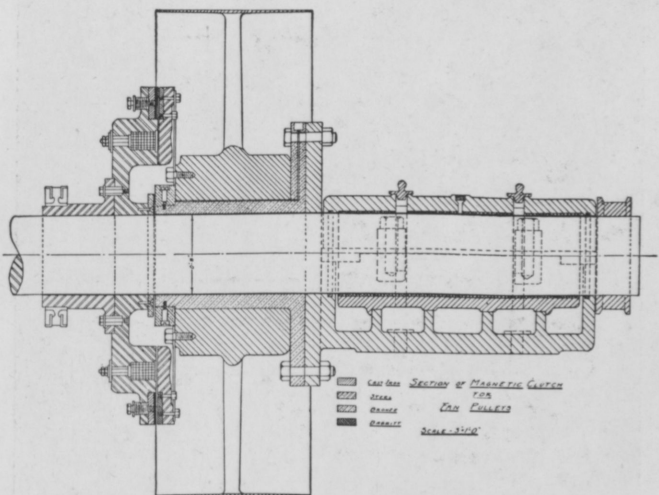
SECTIONAL VIEW OF BEARING, PULLEY AND MAGNETIC CLUTCH
